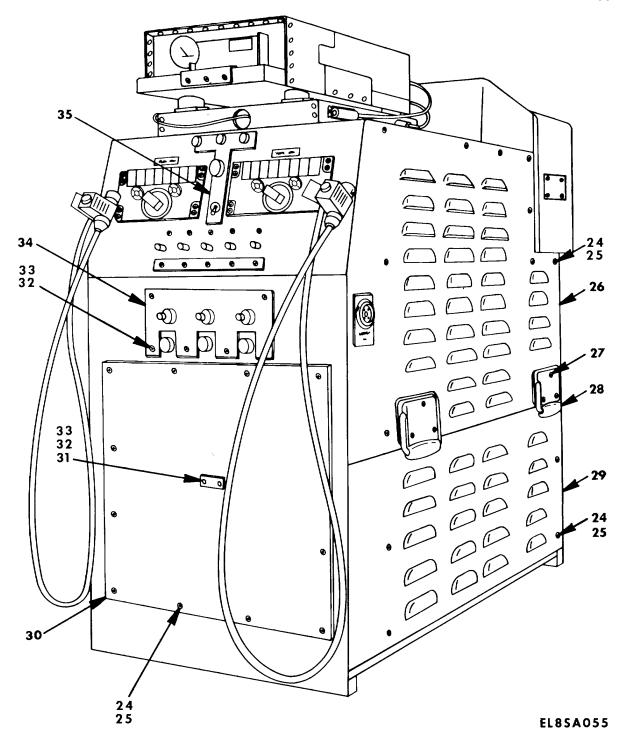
FRAME ASSEMBLY (V)1 & 2 (SHEET 3 OF 4)
